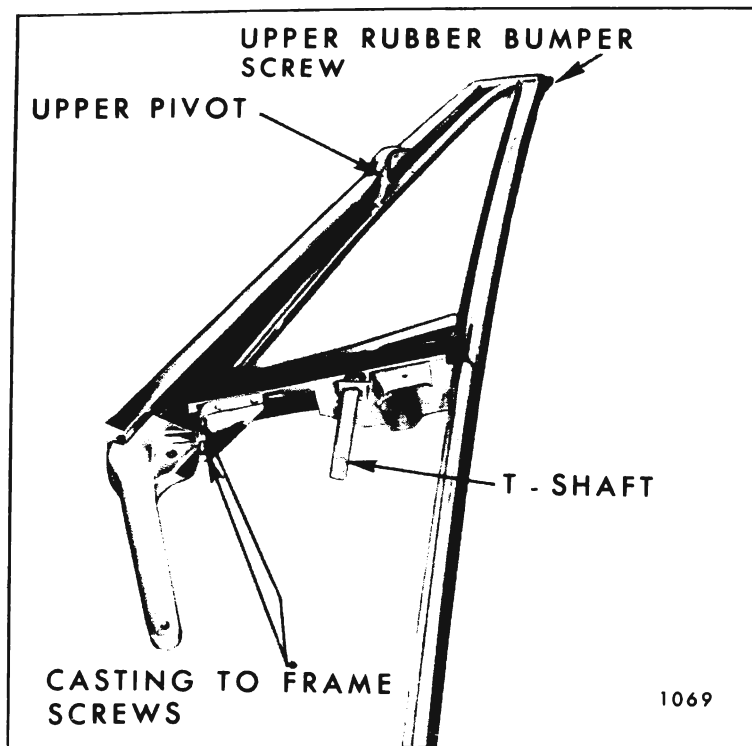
Front Door Ventilator - "B & C" Styles
